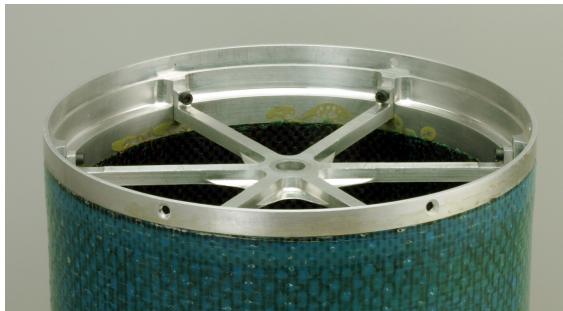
A CF module with the “spider” attachment, which retains the motor in the rocket. The female end is shown.
